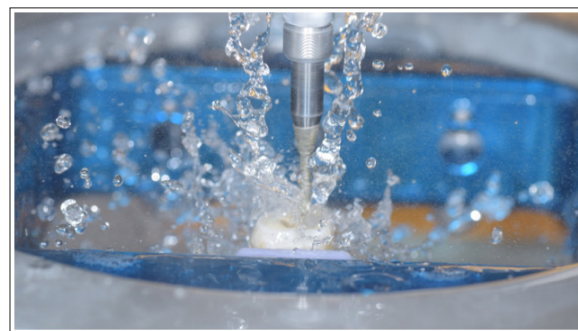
Preparation of tooth specimen using 5x - 400 Arum milling machine with coolant.
